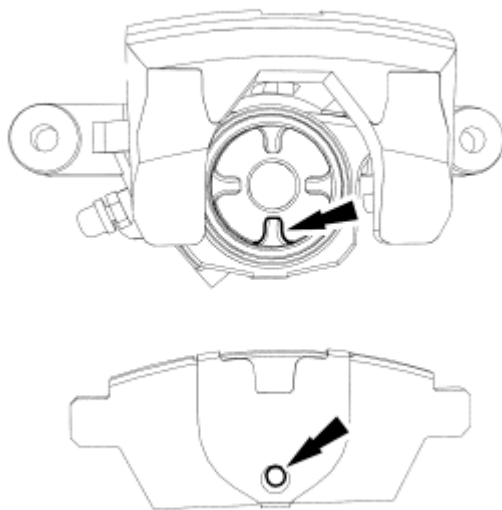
Compressing Brake Caliper Piston Into Caliper
